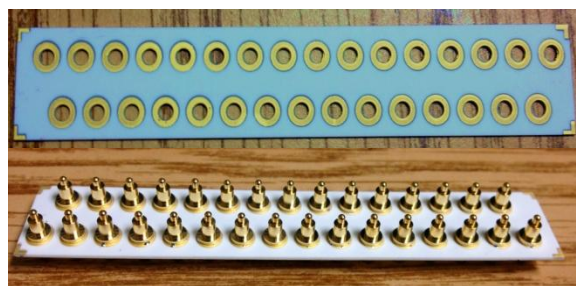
Backplane Board Substrate (Upper) and Assembled Back Plane Board (Lower)
